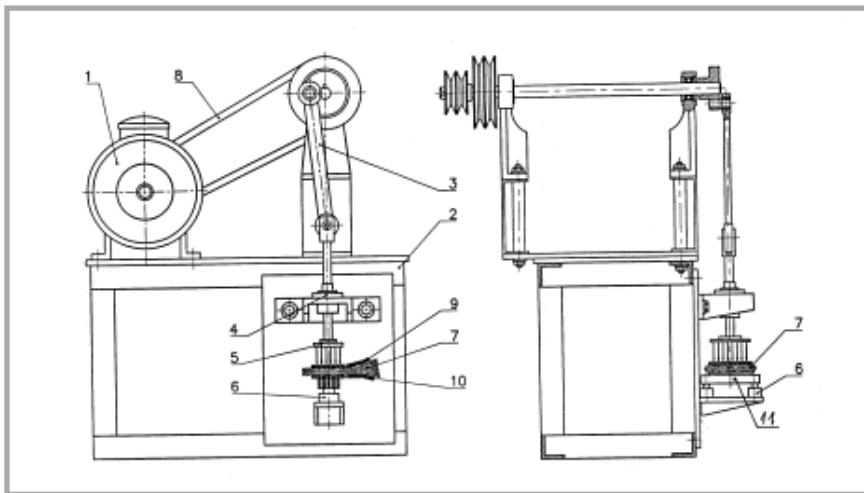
Testing and measuring stand for measurement of punching resistance; 1 - motor; 2 - frame, 3 - crank connecting rod with slider, 4 - guiding cylinder, 5 - bar with punching needles, 6 - piezo-electric force measurement gauge, 7 - needed web, 8 - belt transmission, 9 - upper perforated plate, 10 - bottom perforated plate., 11 - rail.
